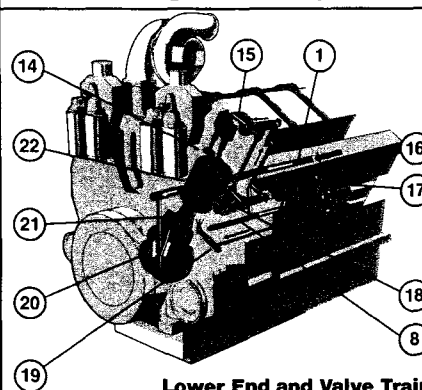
, (LWC-34). Front view optional lubricating oil flow — KT(A)-2300 Engine
